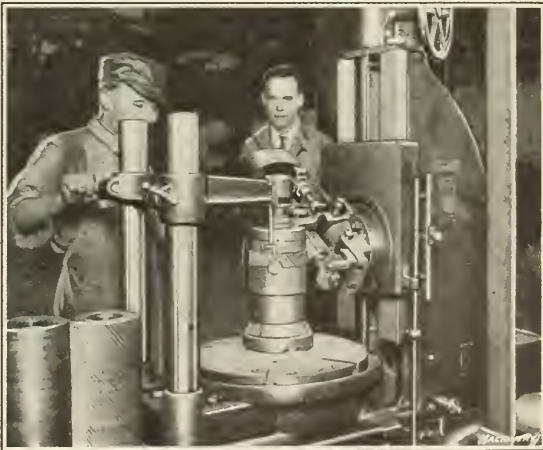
Testing Concentricity of Gears on Gear-hobbing Machine
